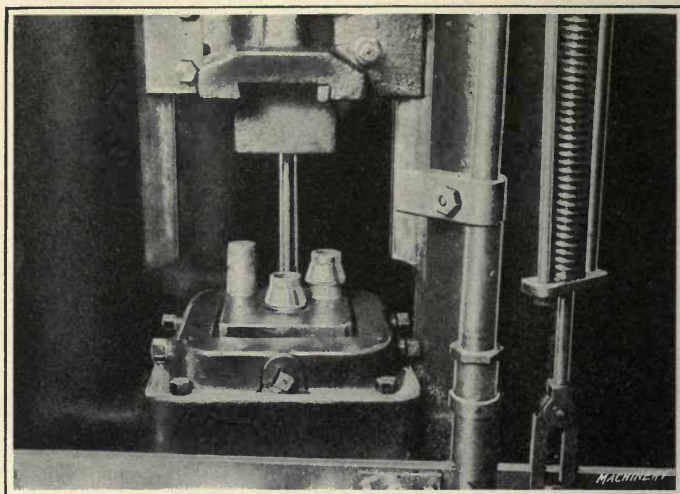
Close View of Percussion Press shown in Fig. 129 showing Dies used and Casting before and after forging
